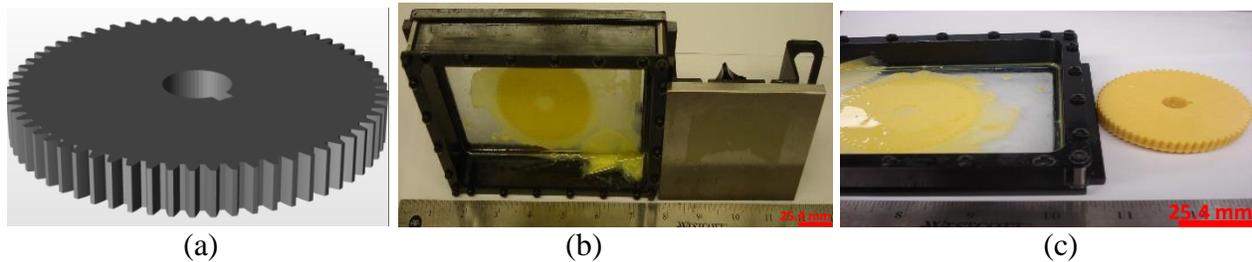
(a) A CAD model of a mechanical gear (b) Failure of printing a mechanical gear in a commercial machine which uses the conventional non-textured constrained surface (c) Comparison between the failed part printed in the commercial machine and the successfully printed part in our setup using textured constrained surface
